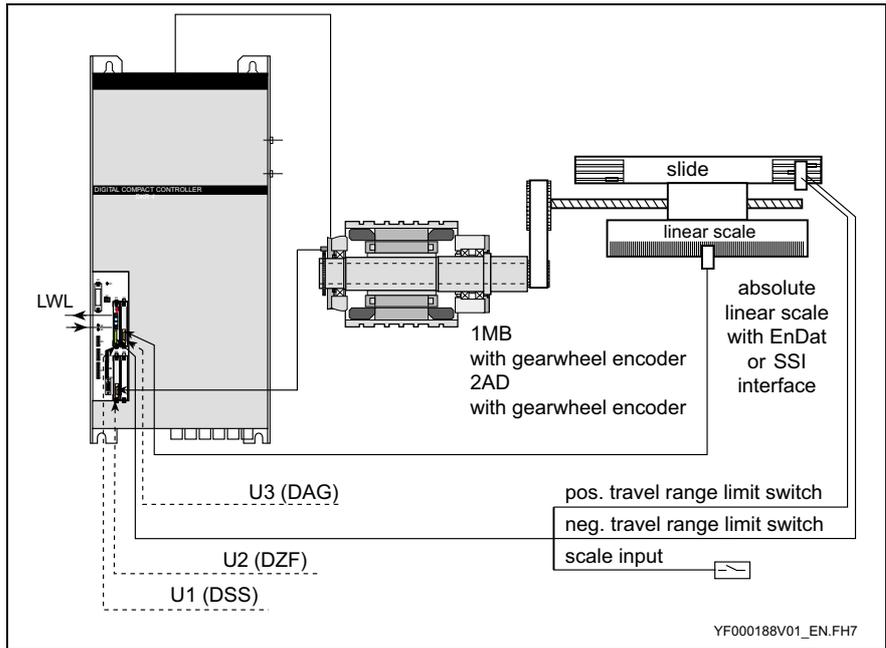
Drive with 1MB or 2AD motor with gearwheel encoder with direct absolute position detection (DKR)
